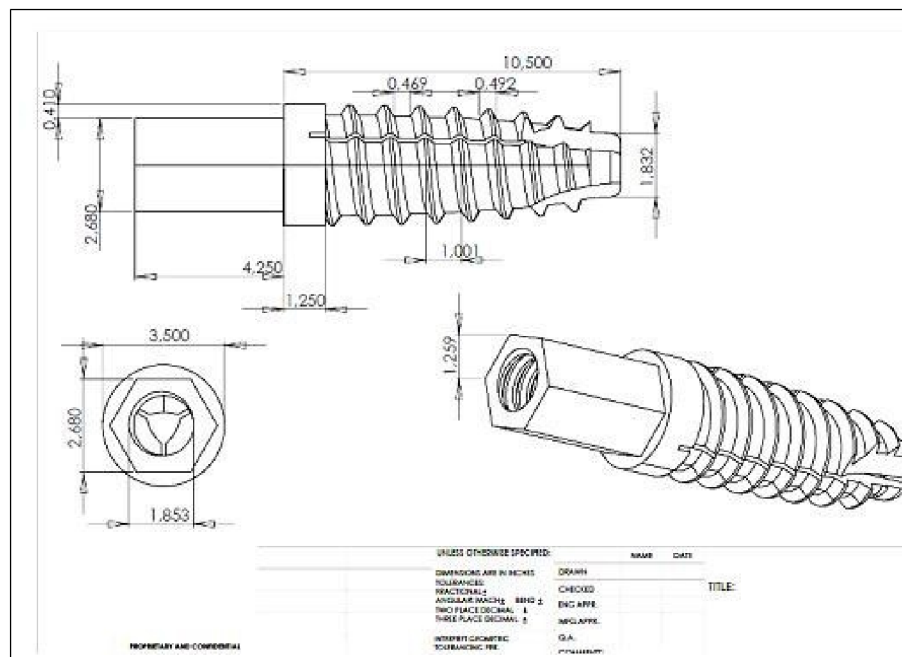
Technical drawing of the model developed in final specification for CNC milling.
